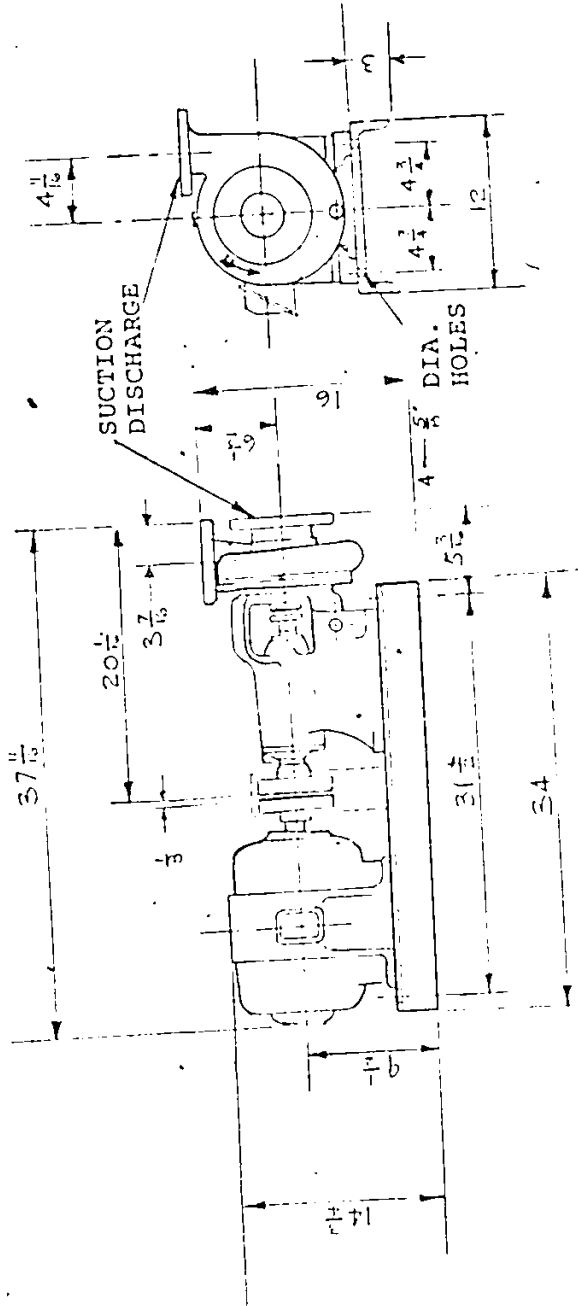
Dimensions of Centrifugal Pump and Motor
